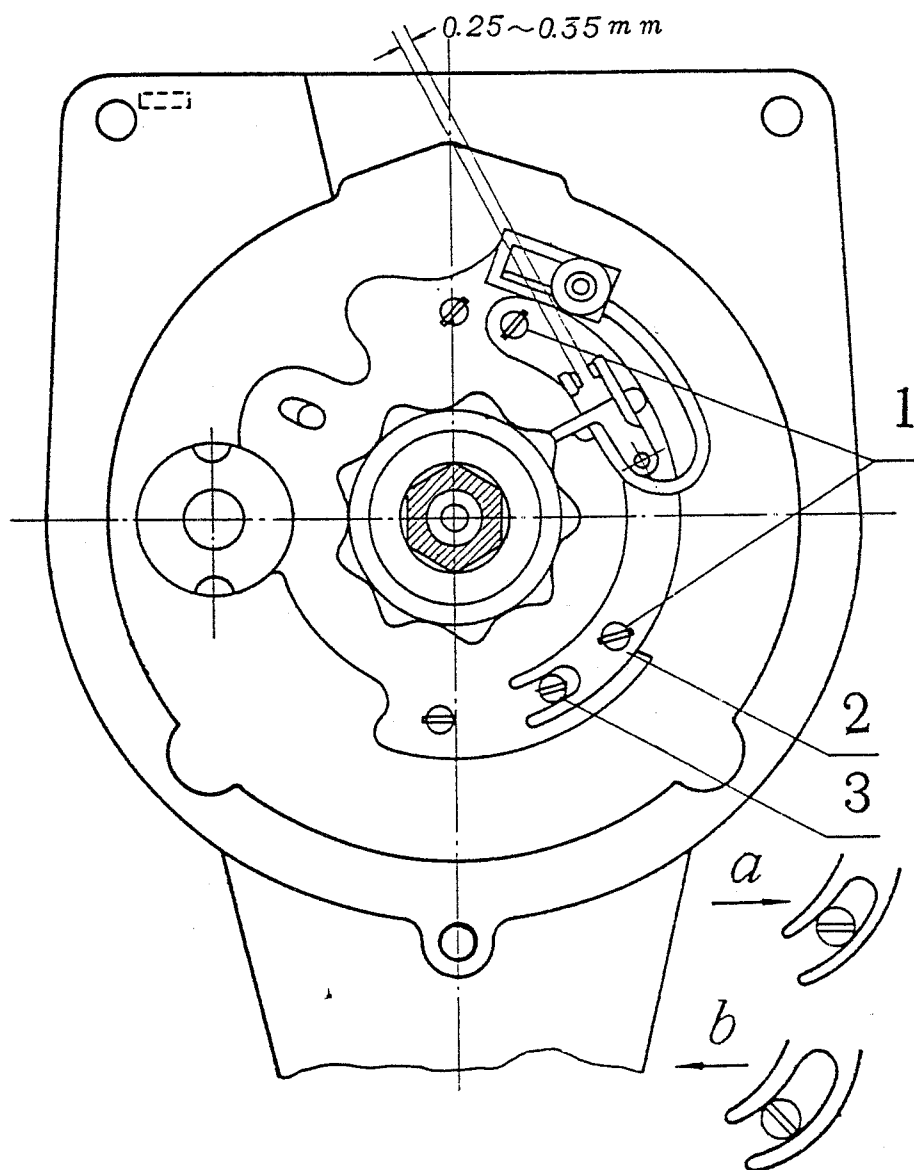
Clearance Adjustment of the Breaker Contact Points
